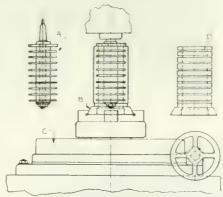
METHOD OF MILLING OUT BLOCKS.
